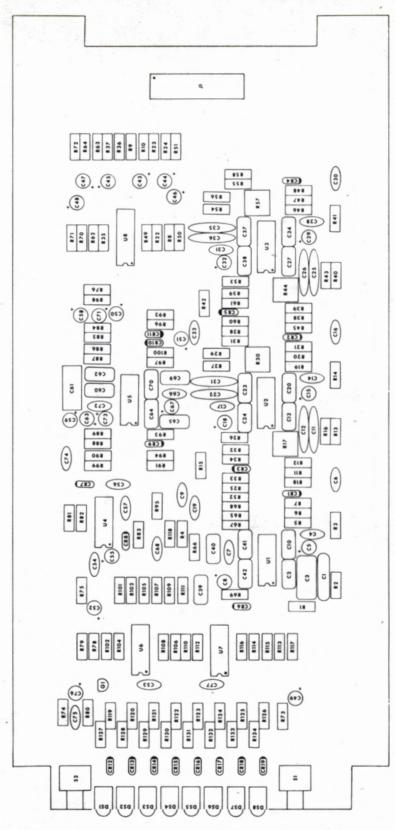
(SHEET 2 OF 2) LIMITER BOARD #2 COMPONENT LOCATION - 843 2199 001
